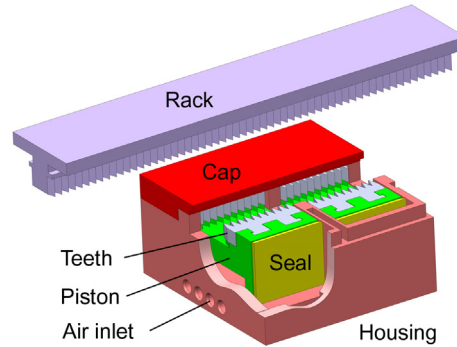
Cut-out view of small-step two-cylinder linear stepper motor.
